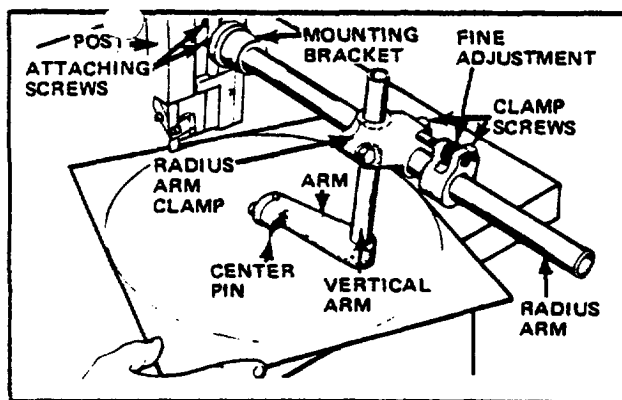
CUTTING RADIUS WITH DISC CUTTER.
